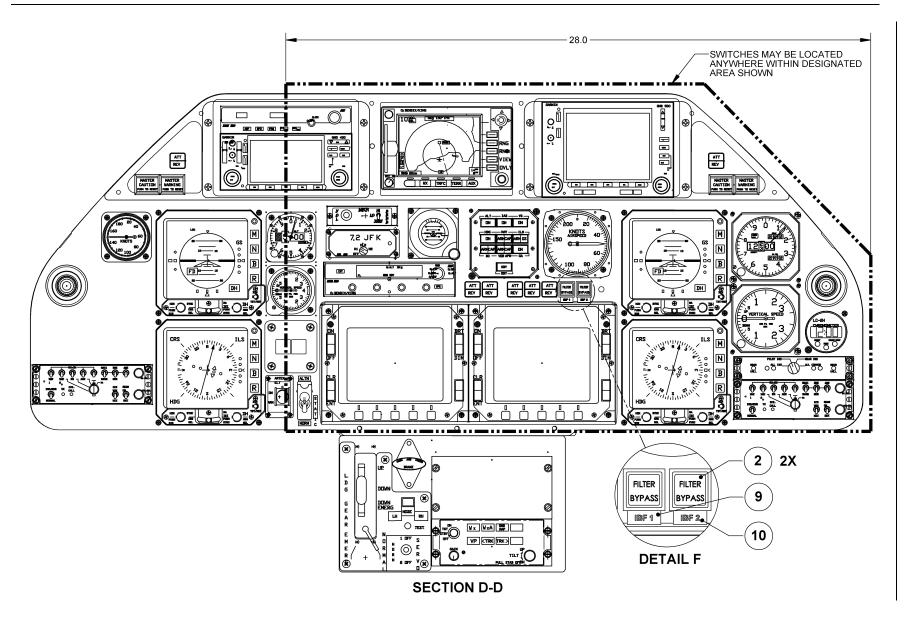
Fwd Electrical Kit (Cockpit Indicator/Switch Details)
